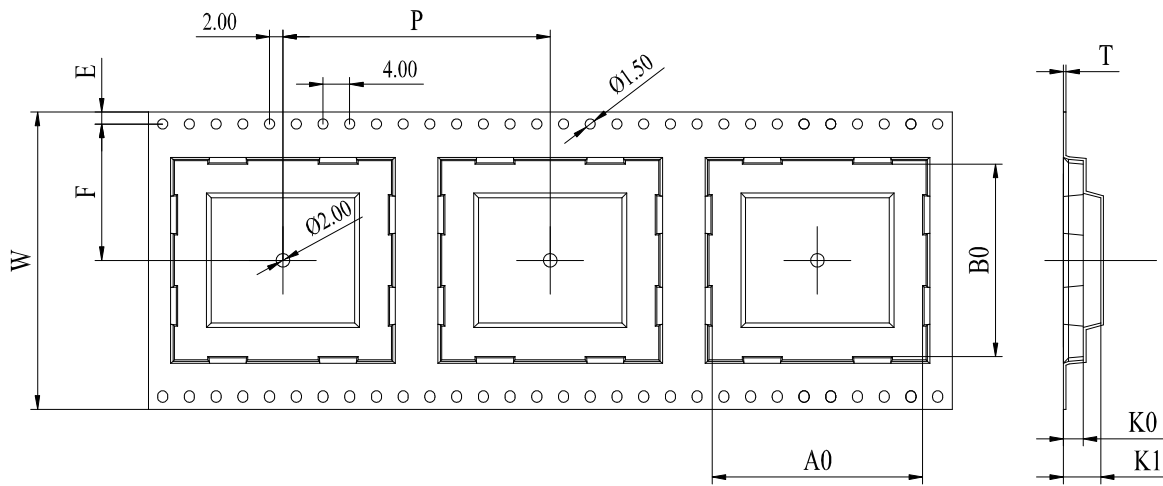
Carrier Tape Dimension Drawing (Unit: mm)
